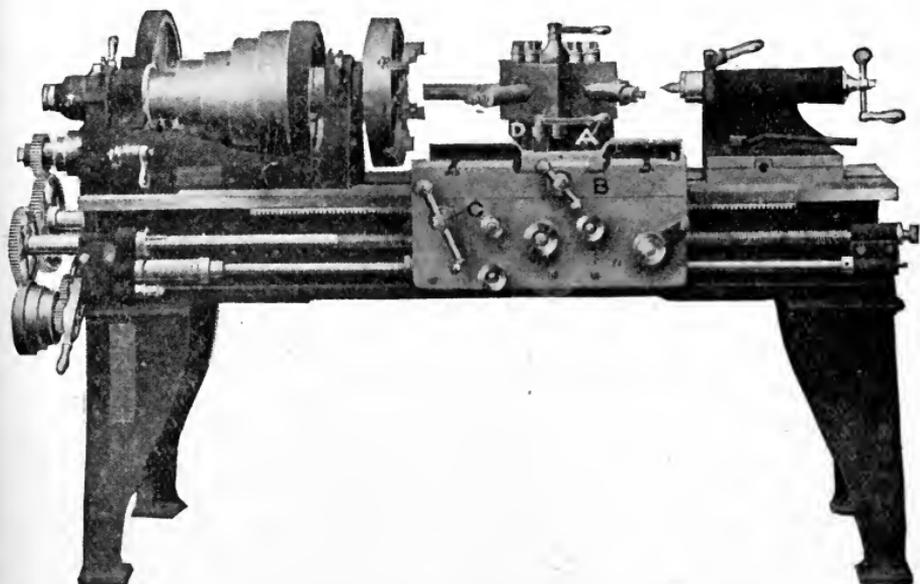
Engine Lathe with Hand-Revolved Turret on Carriage in Place of Tool-Block
